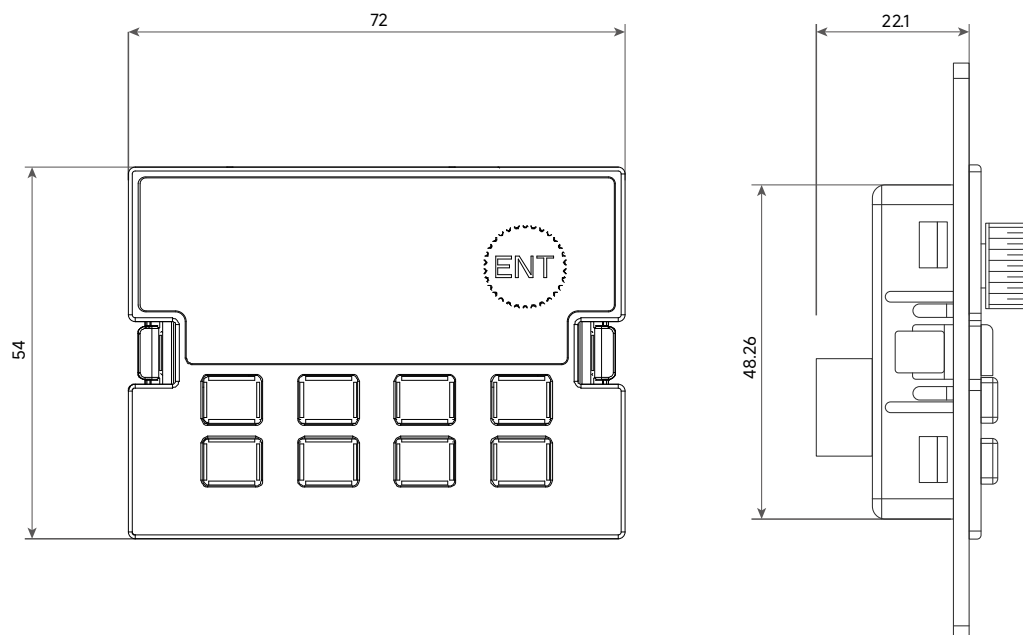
Keypad appearance and dimensions of 380V/22kW (220V/11kW) and below (unit: mm)
